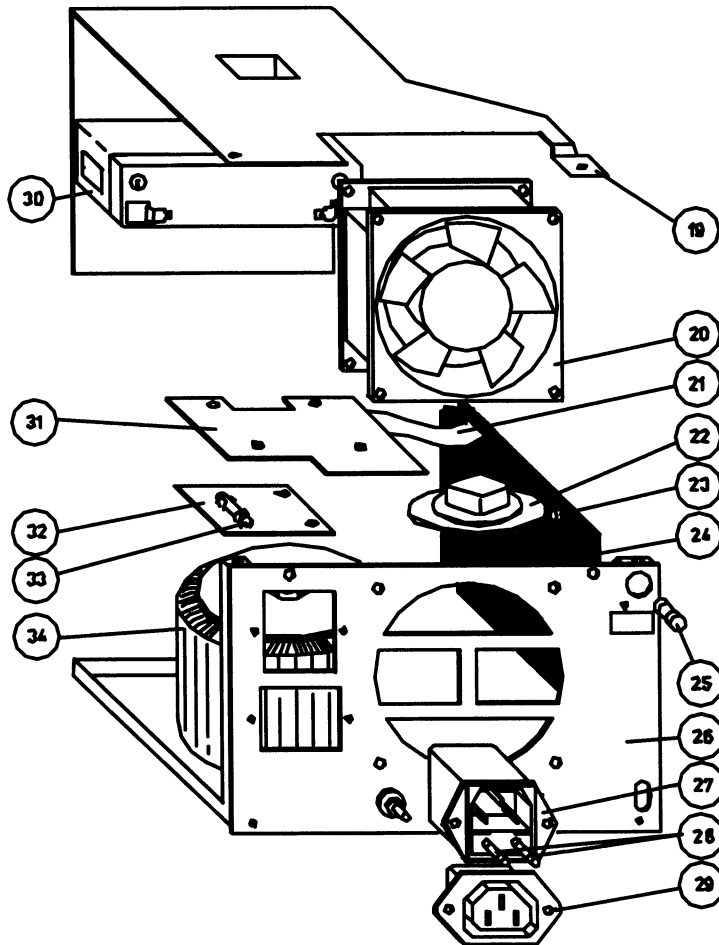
Exploded view of the Power Supply Unit, F-CU8 (rev.03 ...09)
